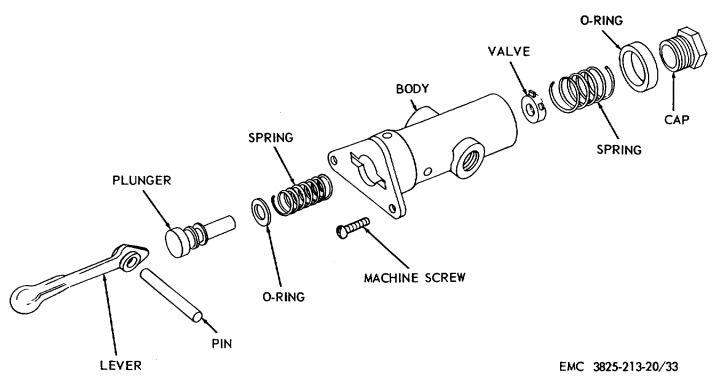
Clutch air valve assembly, diassembly and reassembly, exploded view.
